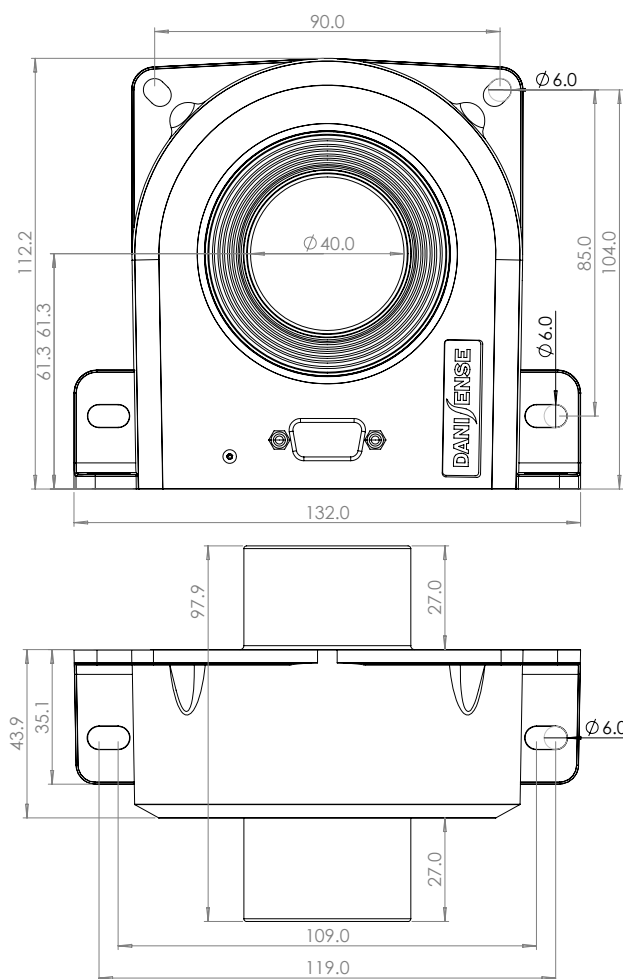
Dimensions of transducer. 0.3 mm Tolerance
